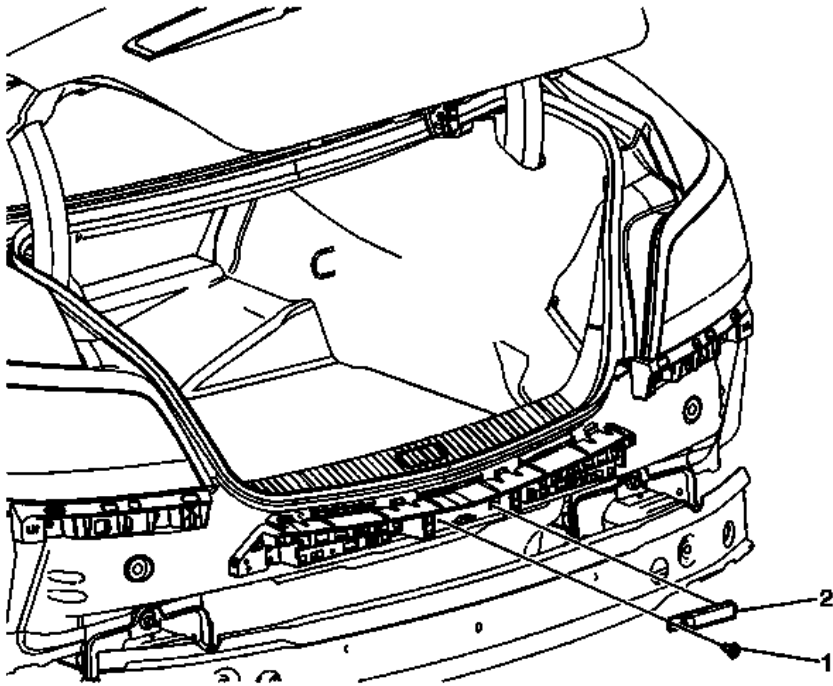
Ignition Lock Key Transmitter Antenna - Rear Bumper Fascia
